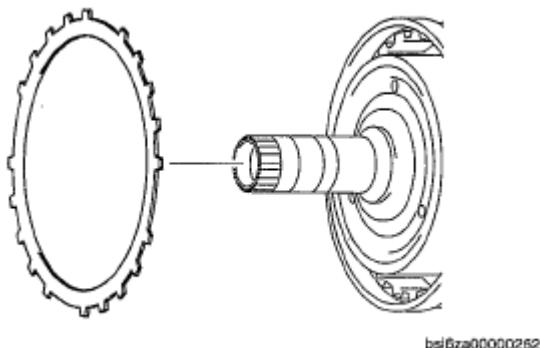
Identifying Retaining Plate On C3 Clutch Piston Component
